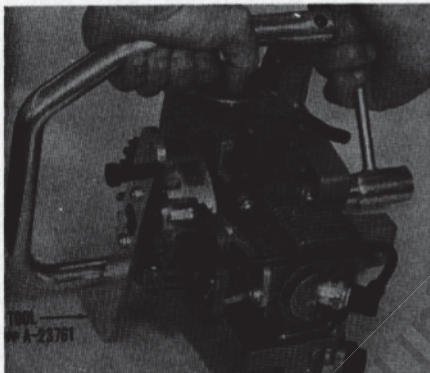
Using Homelite tool No. A-23761 to keep crankshaft from turning while removing clutch retaining nut and clutch rotor. Homelite tool No. A-23696 is used to remove or install clutch rotor.
